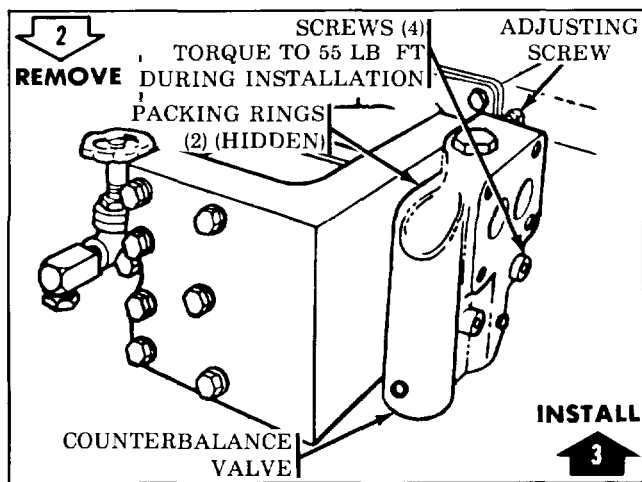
Hoist winch assembly-partial exploded view-disassembly and assembly.
